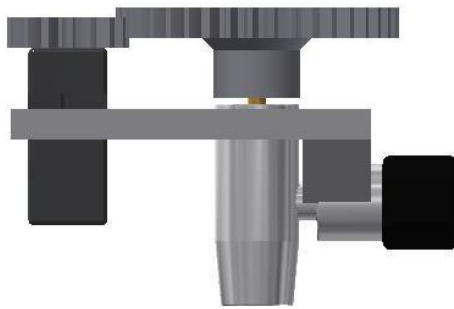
Prototype 4 Release Valve by Jaco Jacobs 2022
